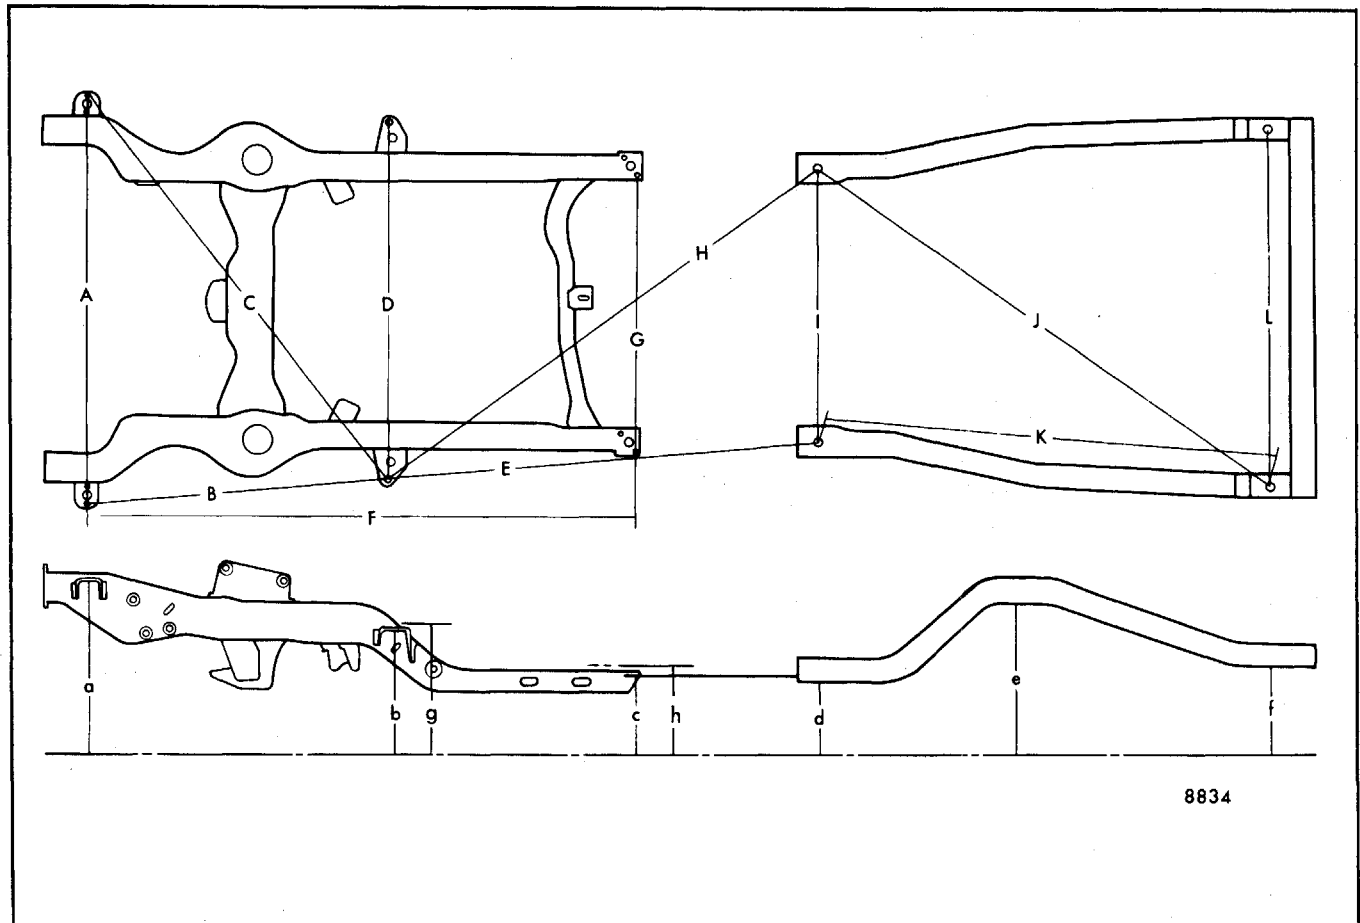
Horizontal and Vertical Checking Dimensions - "K" Body
